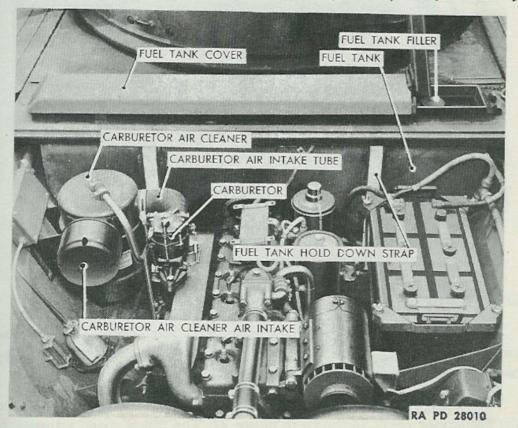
Fuel Tank, Carburetor and Carburetor Air Cleaner
